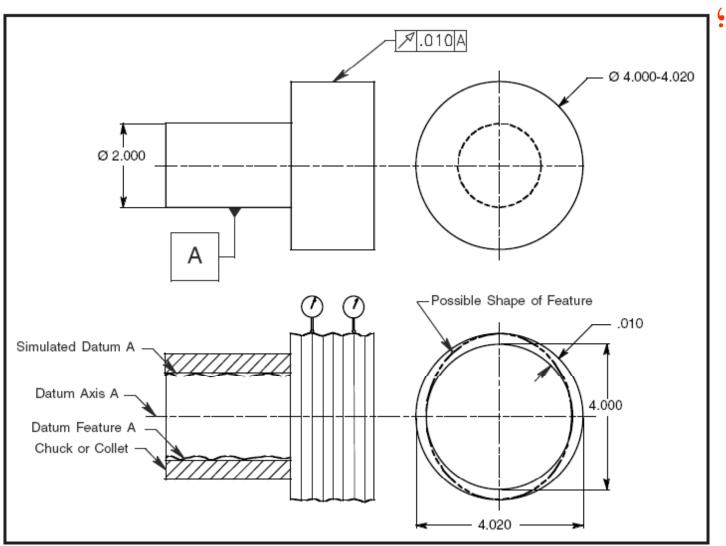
Inspecting circular runout relative to a datum axis.
